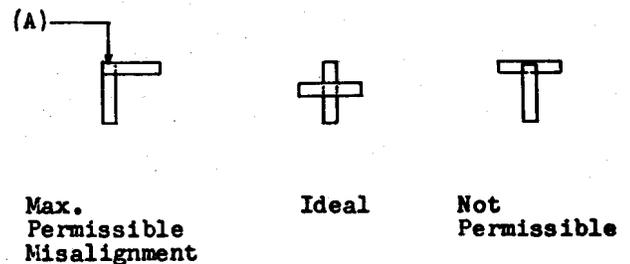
Alignment of Contacts — Plan View of Contact Surfaces
